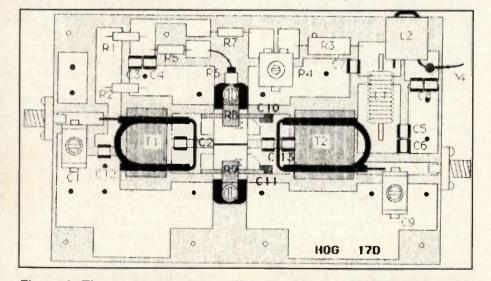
The component layout diagram. The only critical component locations are those of C2 and C13. They must be soldered in place ($\frac{1}{2}$ of C13) before the mounting of the input-output transformers.
